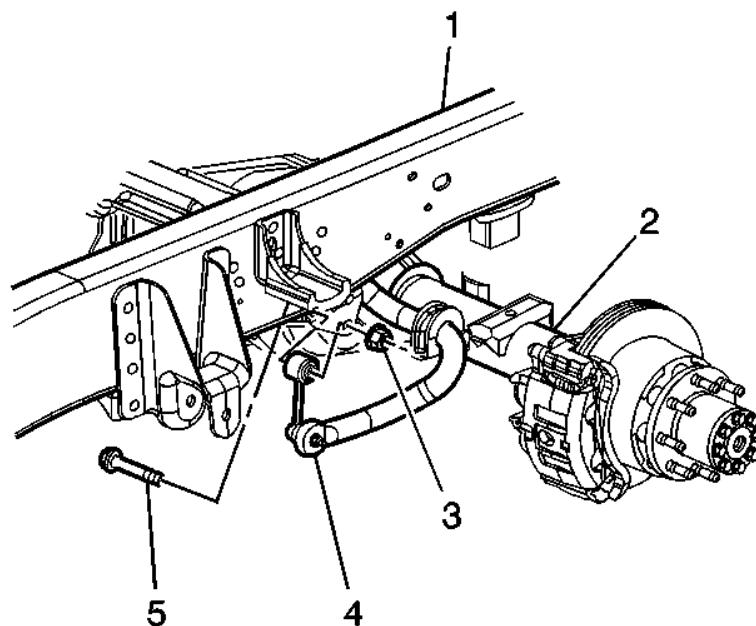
Stabilizer Shaft Link, Bolt & Nut
